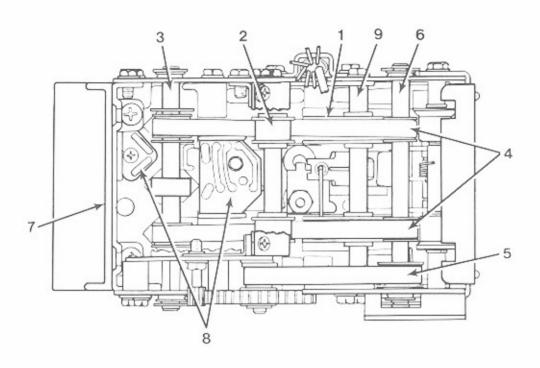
OBA-2 Transport Assembly (Sheet 2)
